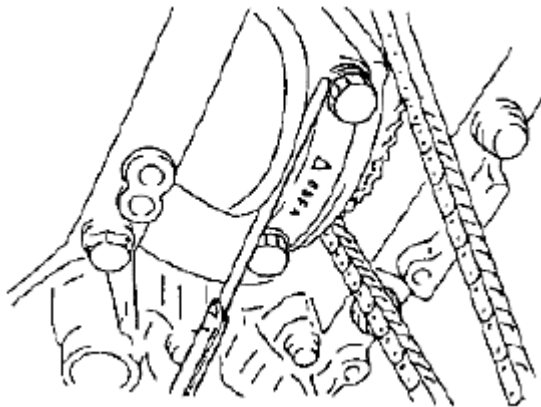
Checking Big-End Of Connecting Rod For Side Clearance
